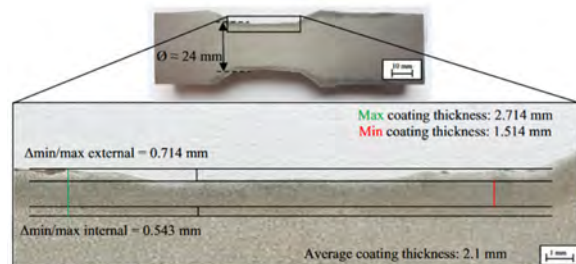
Multi-material workpiece after cross wedge rolling [2].
